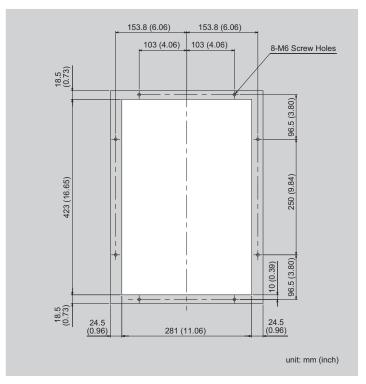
Panel Cut-Out Dimensions (CIMR-A□4T0072U)
